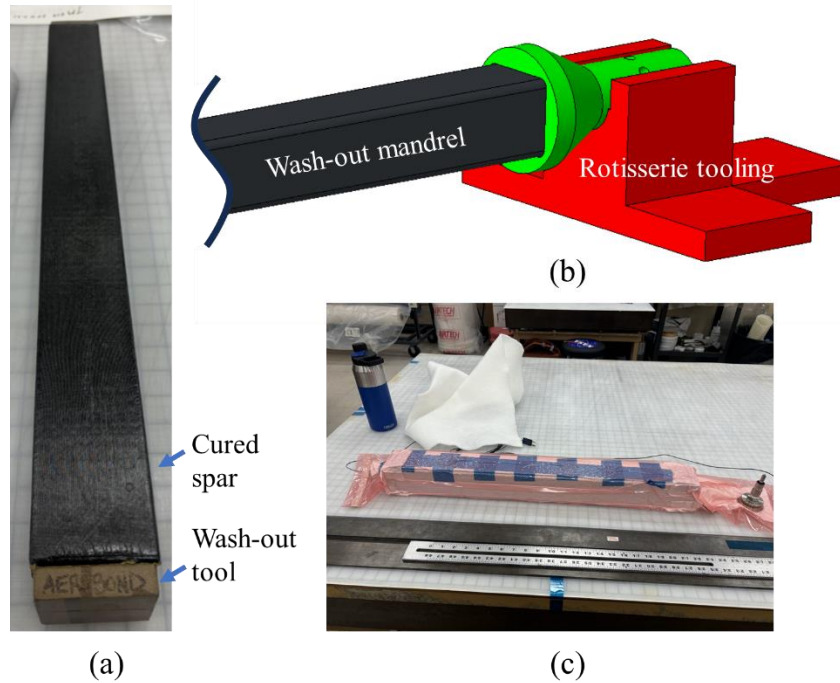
(a) Cured spar on wash-out tool, (b) rotisserie tooling for mandrel layup, (c) bagged spar and wash-out tool.
